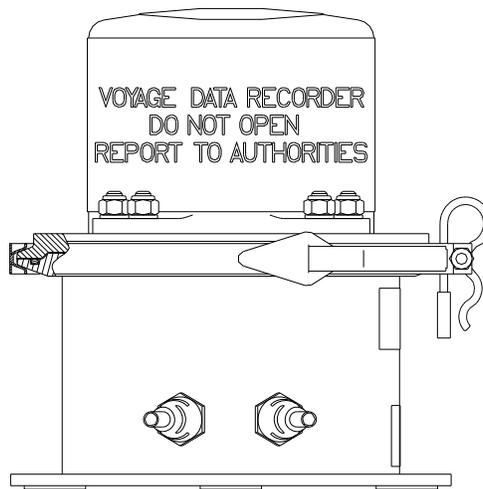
L3 HVR-02 Fixed FRM Capsule
